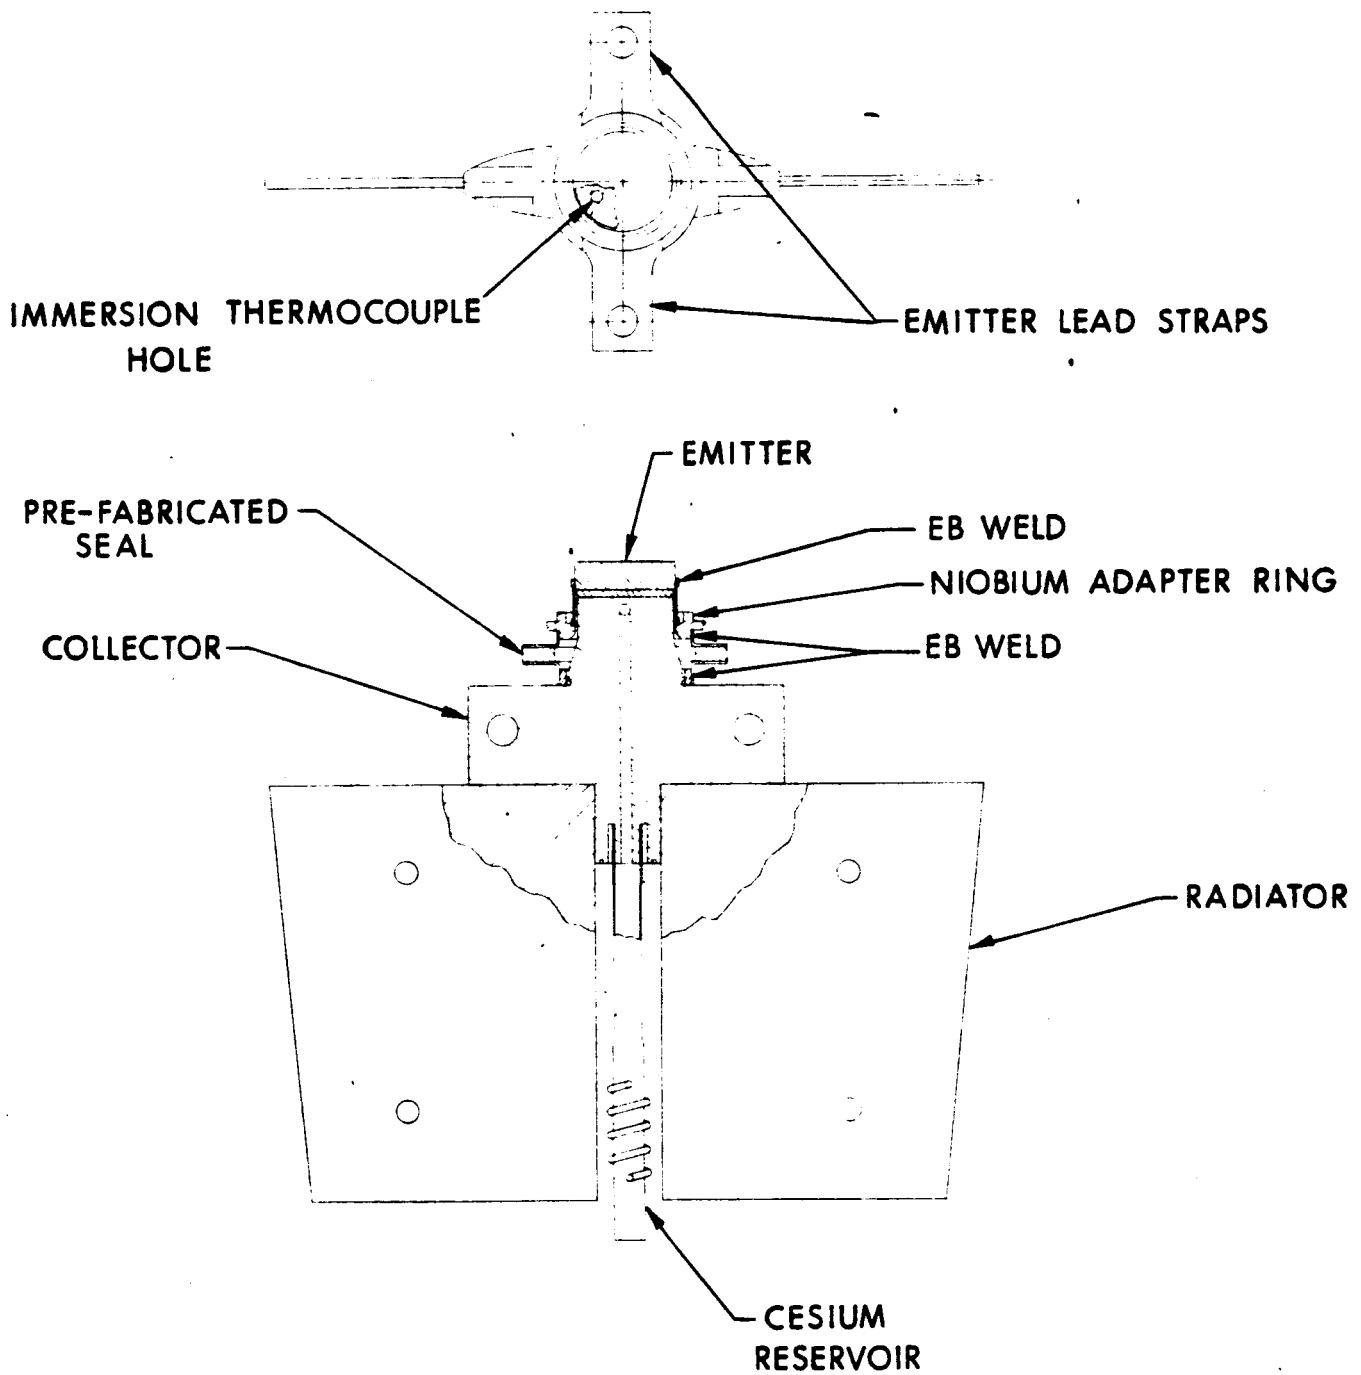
CONVERTER SN-101 ASSEMBLY
